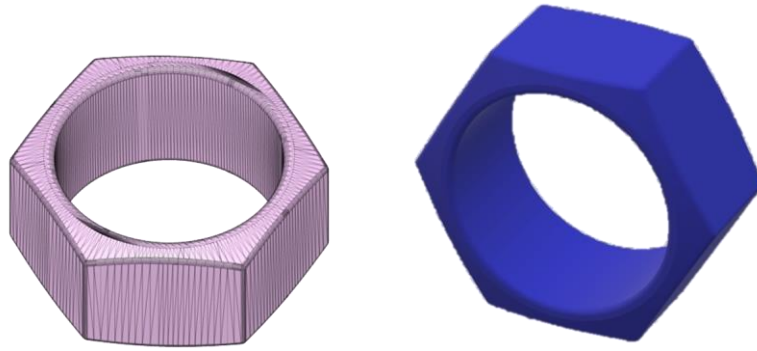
CAD drawing of hexagonal ring for the pressure sensing ring prototype
